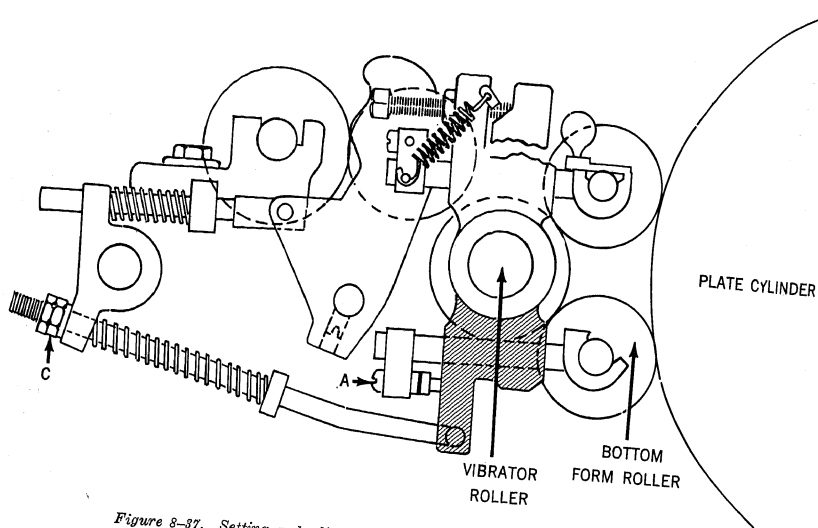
Setting and adjusting bottom form roller (dampening assembly).
